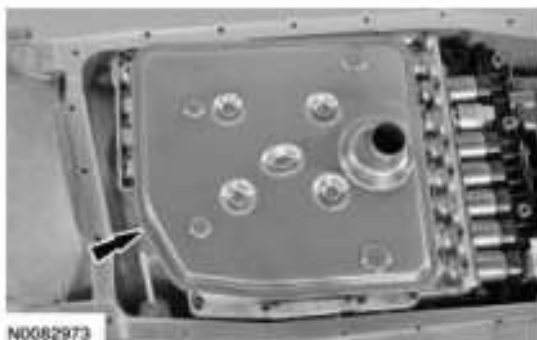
Locating Tab And Bulkhead Electrical Connector
